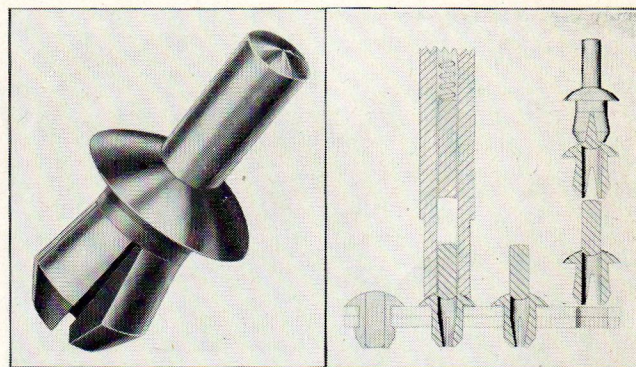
'Des-Rivet' plastic blind fastening rivet molded in one piece. Fig. 2—Steps in application. Single operation drives rivet.
